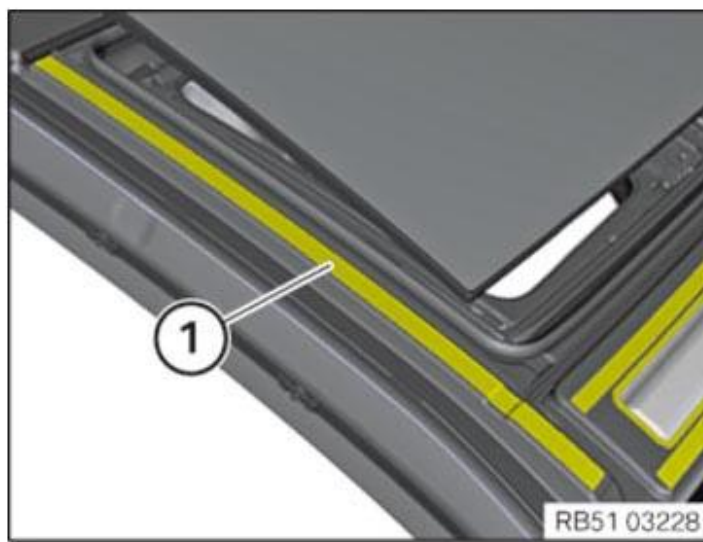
Identifying Uninterrupted Bead And Adhesive Tape
